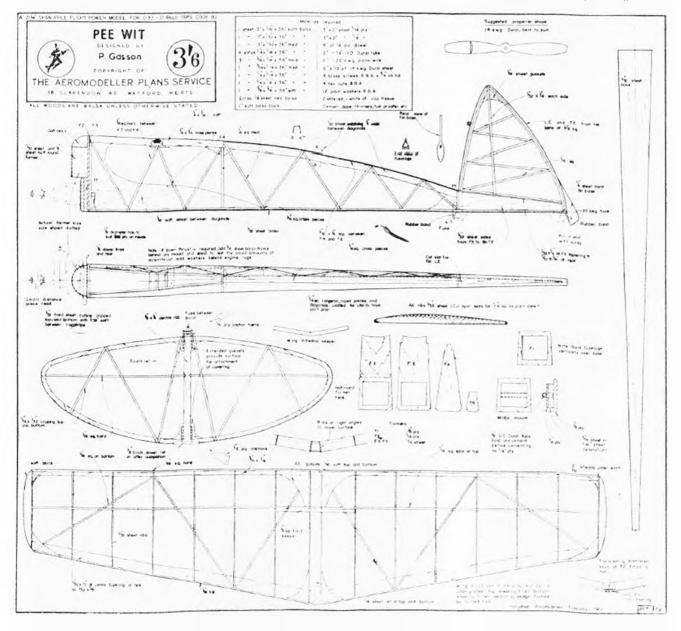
Note "Warren Girder" construction on fuselage, fin and tail. Also front and back sheeting of fuselage
